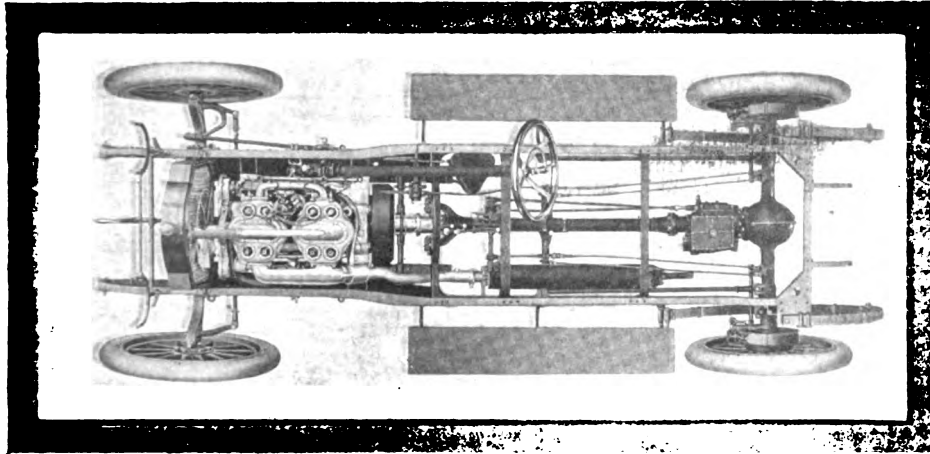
Plan view of the Republic chassis, showing the general arrangement of the motor and the transmission located on the live rear axle
